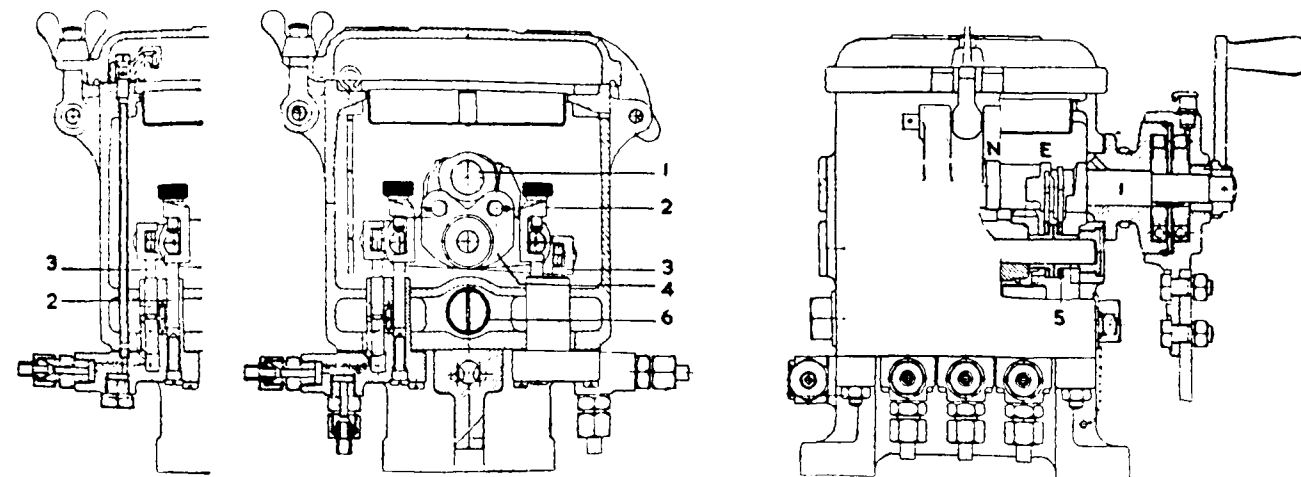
Sectional drawing of the Type F.S.A. Lubricator. LH drawing shows method of converting pumping units to single feeds instead of double ones.
